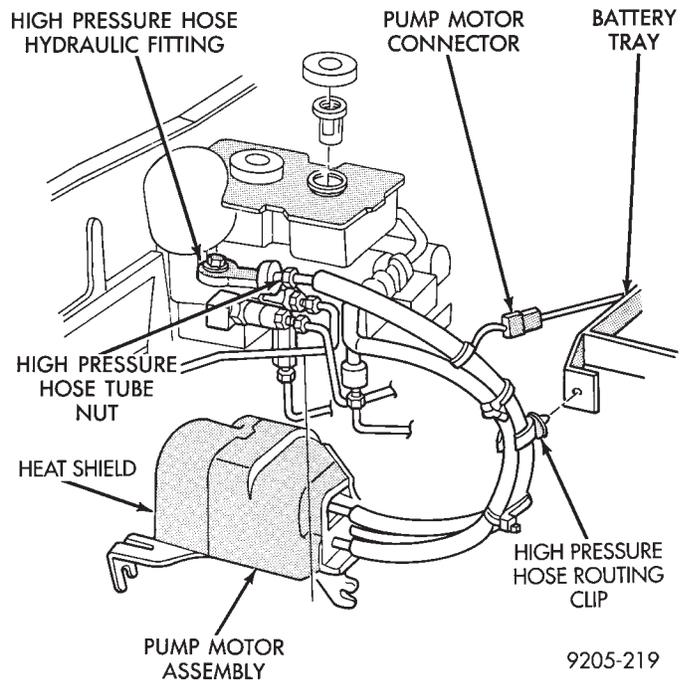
Brake Tube and Hose Routing at Hydraulic Unit
